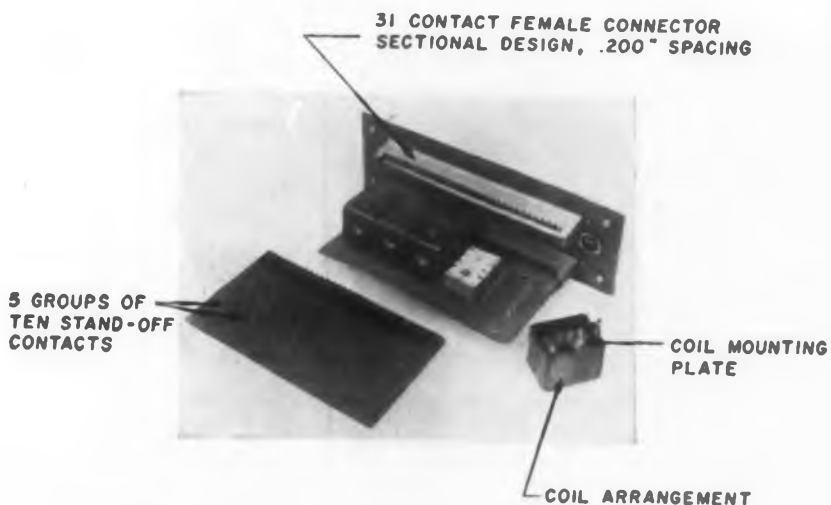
shows a computer modular assembly designed by Federal Telecommunication Laboratory, Nutley, N.J. Printed circuit wiring is on the under side of the
